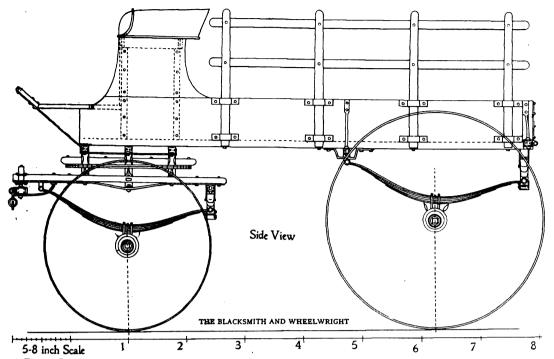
Represents a similar body to Fig. 1 except the Seat is Higher, has Wing Boards, and Wheels Turn Under the Sills.
